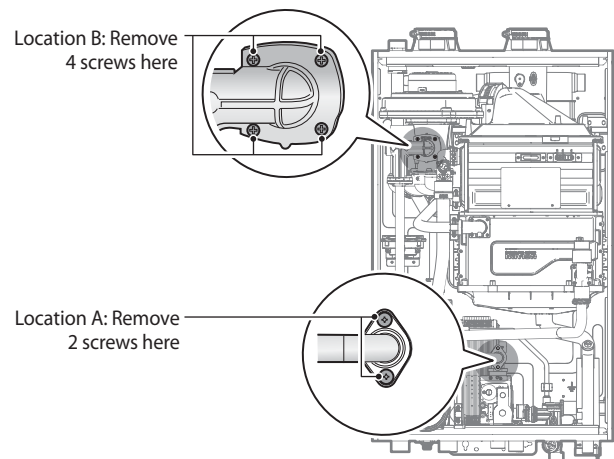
Detaching Gas Valve from Gas Inlet Pipe and Fan Motor Assembly
